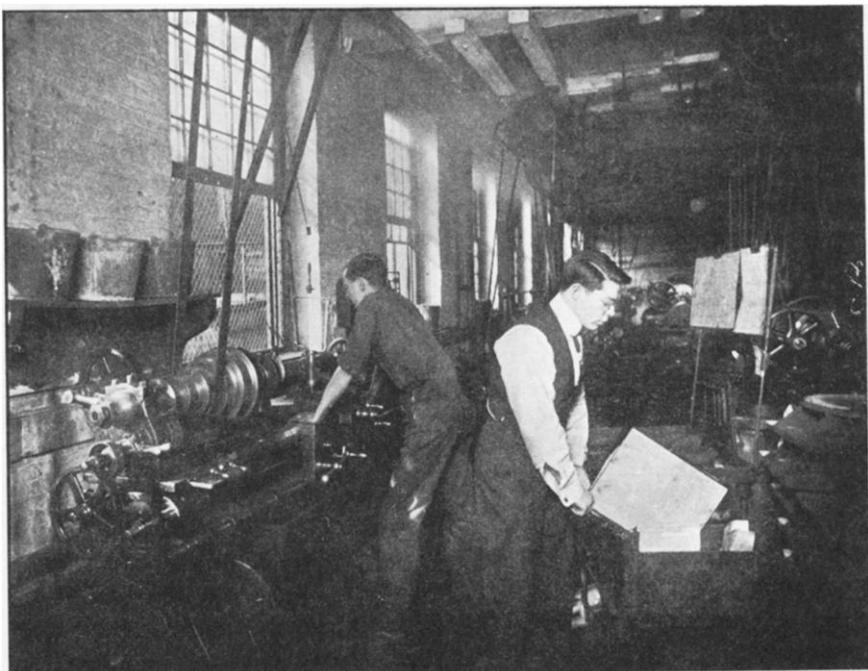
DELIVERING DRAWING, TOOL LIST AND INSTRUCTION CARD TO MACHINE.
